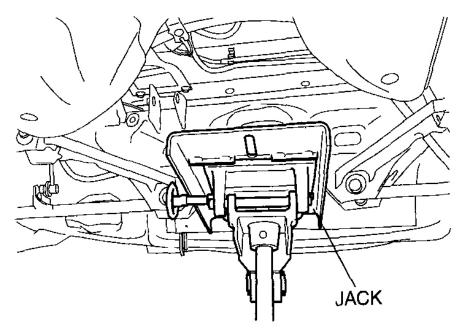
Disconnecting Rear Lateral Link (Lower) Ball Joint Using SST Courtesy of MAZDA MOTORS CORP.
